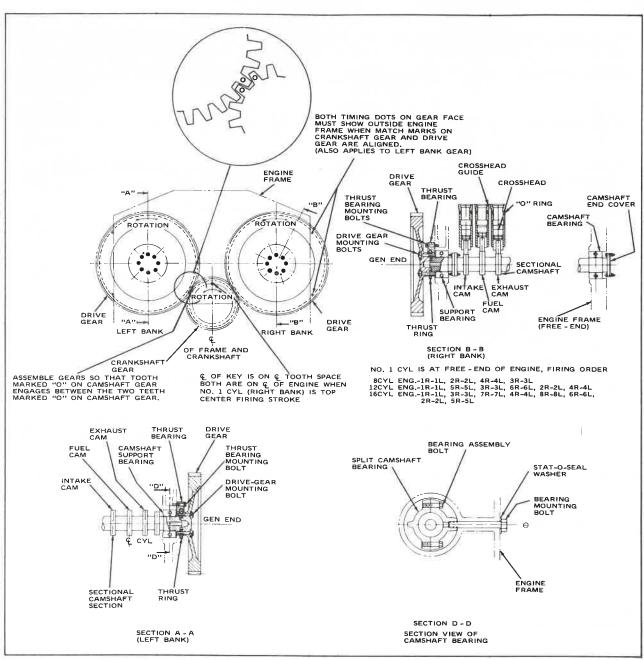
CAMSHAFT DRIVE AND ASSEMBLY.
